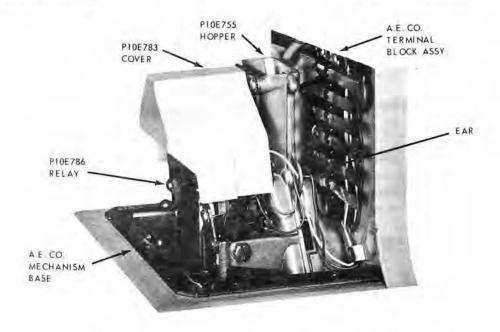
P11E964 Relay and Hopper Assembly, Installed in A.E. Co. Coin Telephone Set.
